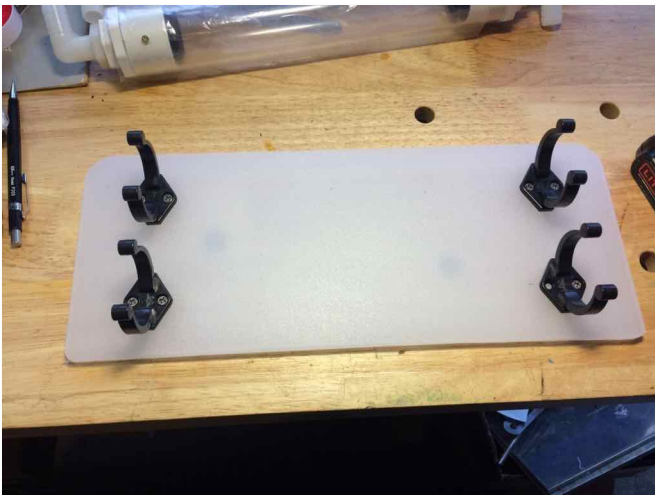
Backer board with clips to hold the desiccant-filled tubes. The board will be mounted to a bulkhead in the boat.
